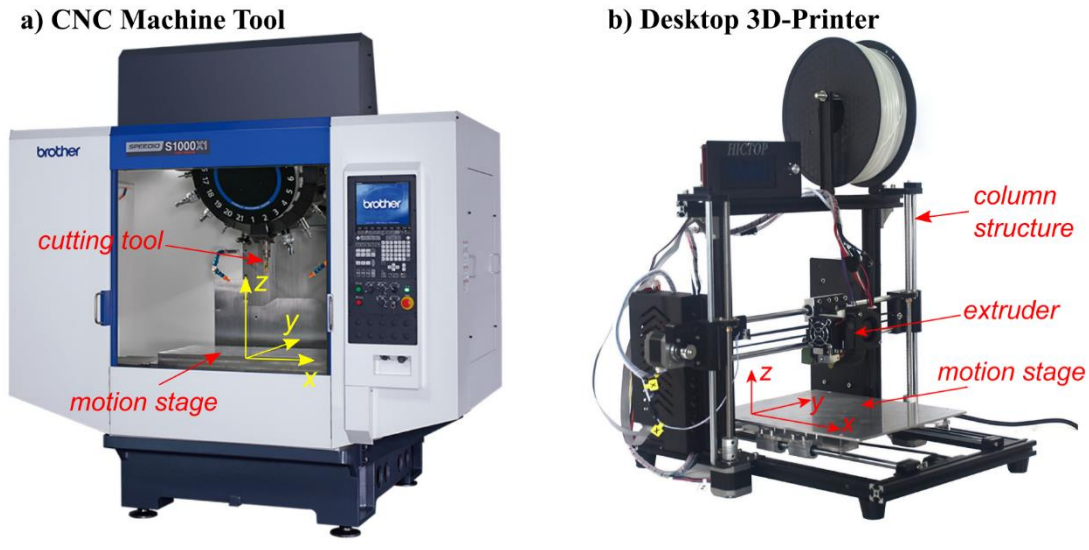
Examples of a CNC machine tool (a) and a 3D-Printer (b).
